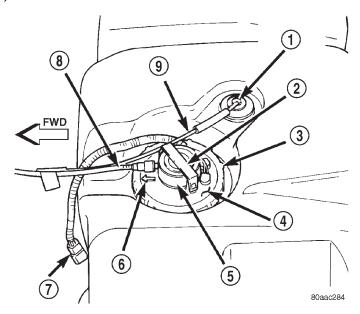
Fuel Tank/Fuel Pump Module (Top View)
